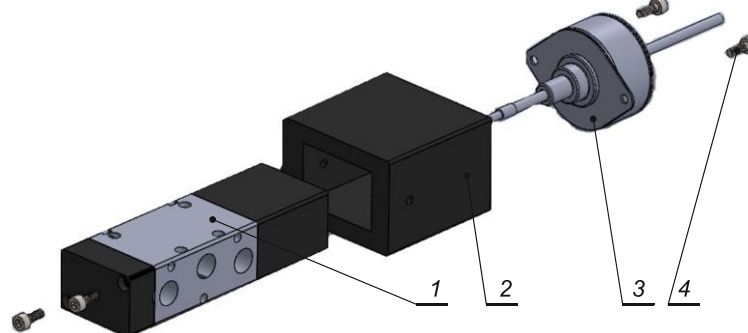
Components of 5/3 valve, 1 –M3 screws, 2 – valve parts, 3 – slider, 4 – sealing.
